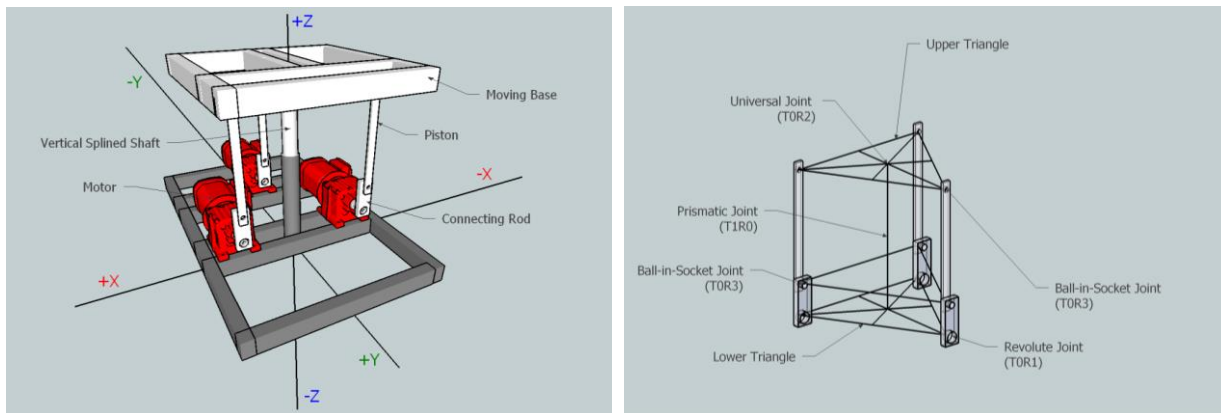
a) The 3-DOF T1R2 parallel manipulator analyzed in this paper. b) Joints and movable elements of this device.
